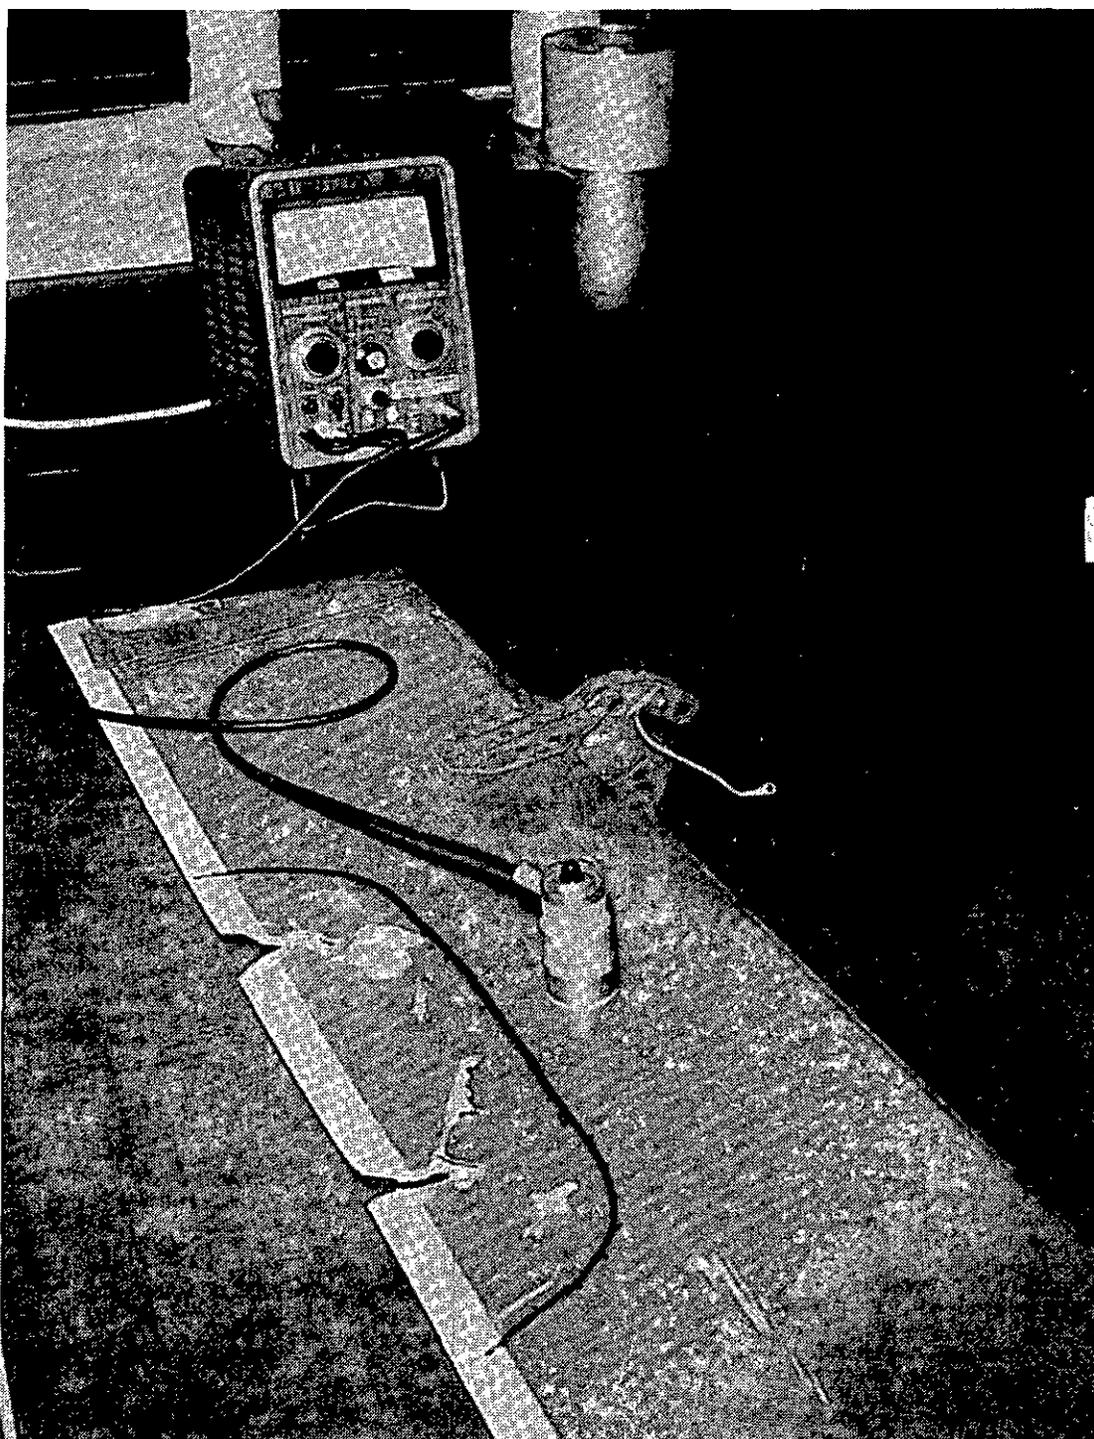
(a) *Harmonic bond tester being used to inspect honeycomb component.
